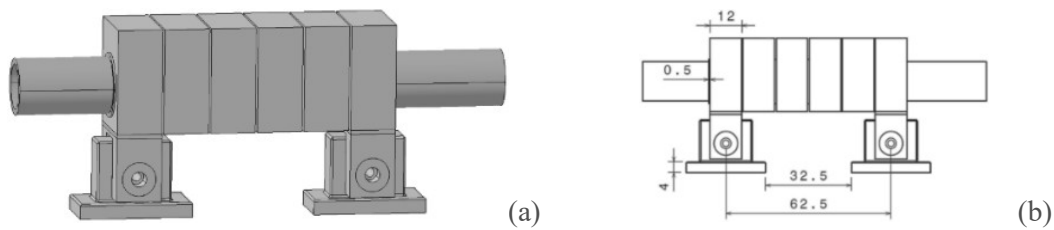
A typical target element segment (a) and the technical drawing (b).
